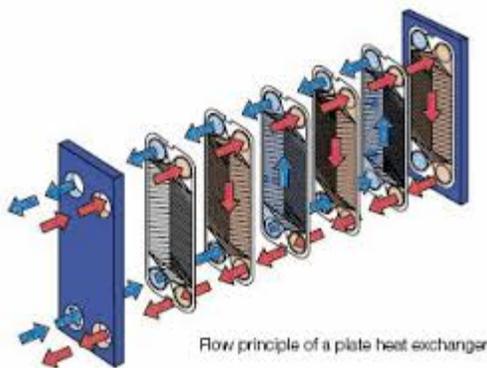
Gasketed-Plate Heat Exchanger (wassertech.com)
